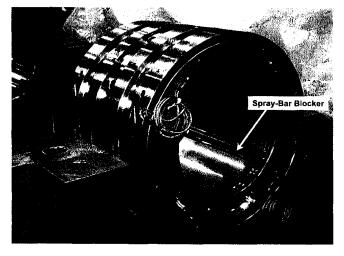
54,000 HP Pinion Bearing with Spray-Bar Blocker in Gear Case.
